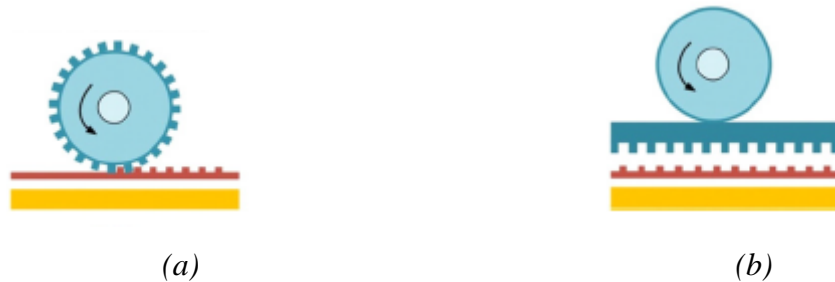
schematic representation of roll-to-plate hot embossing technique. (a) rolling a cylinder mold on the substrate. (b) rolling a smooth roller on a flat mold placed over the substrate
